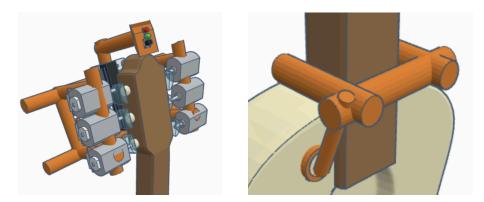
(left): Motor Mount with Control System and PCB Figure 3 (right): Piezo Sensor Mounted at Neck of Guitar
